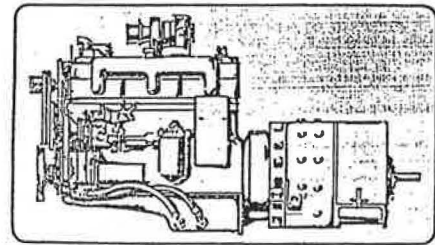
Power car would use two engines of this general type, 600 hp.
